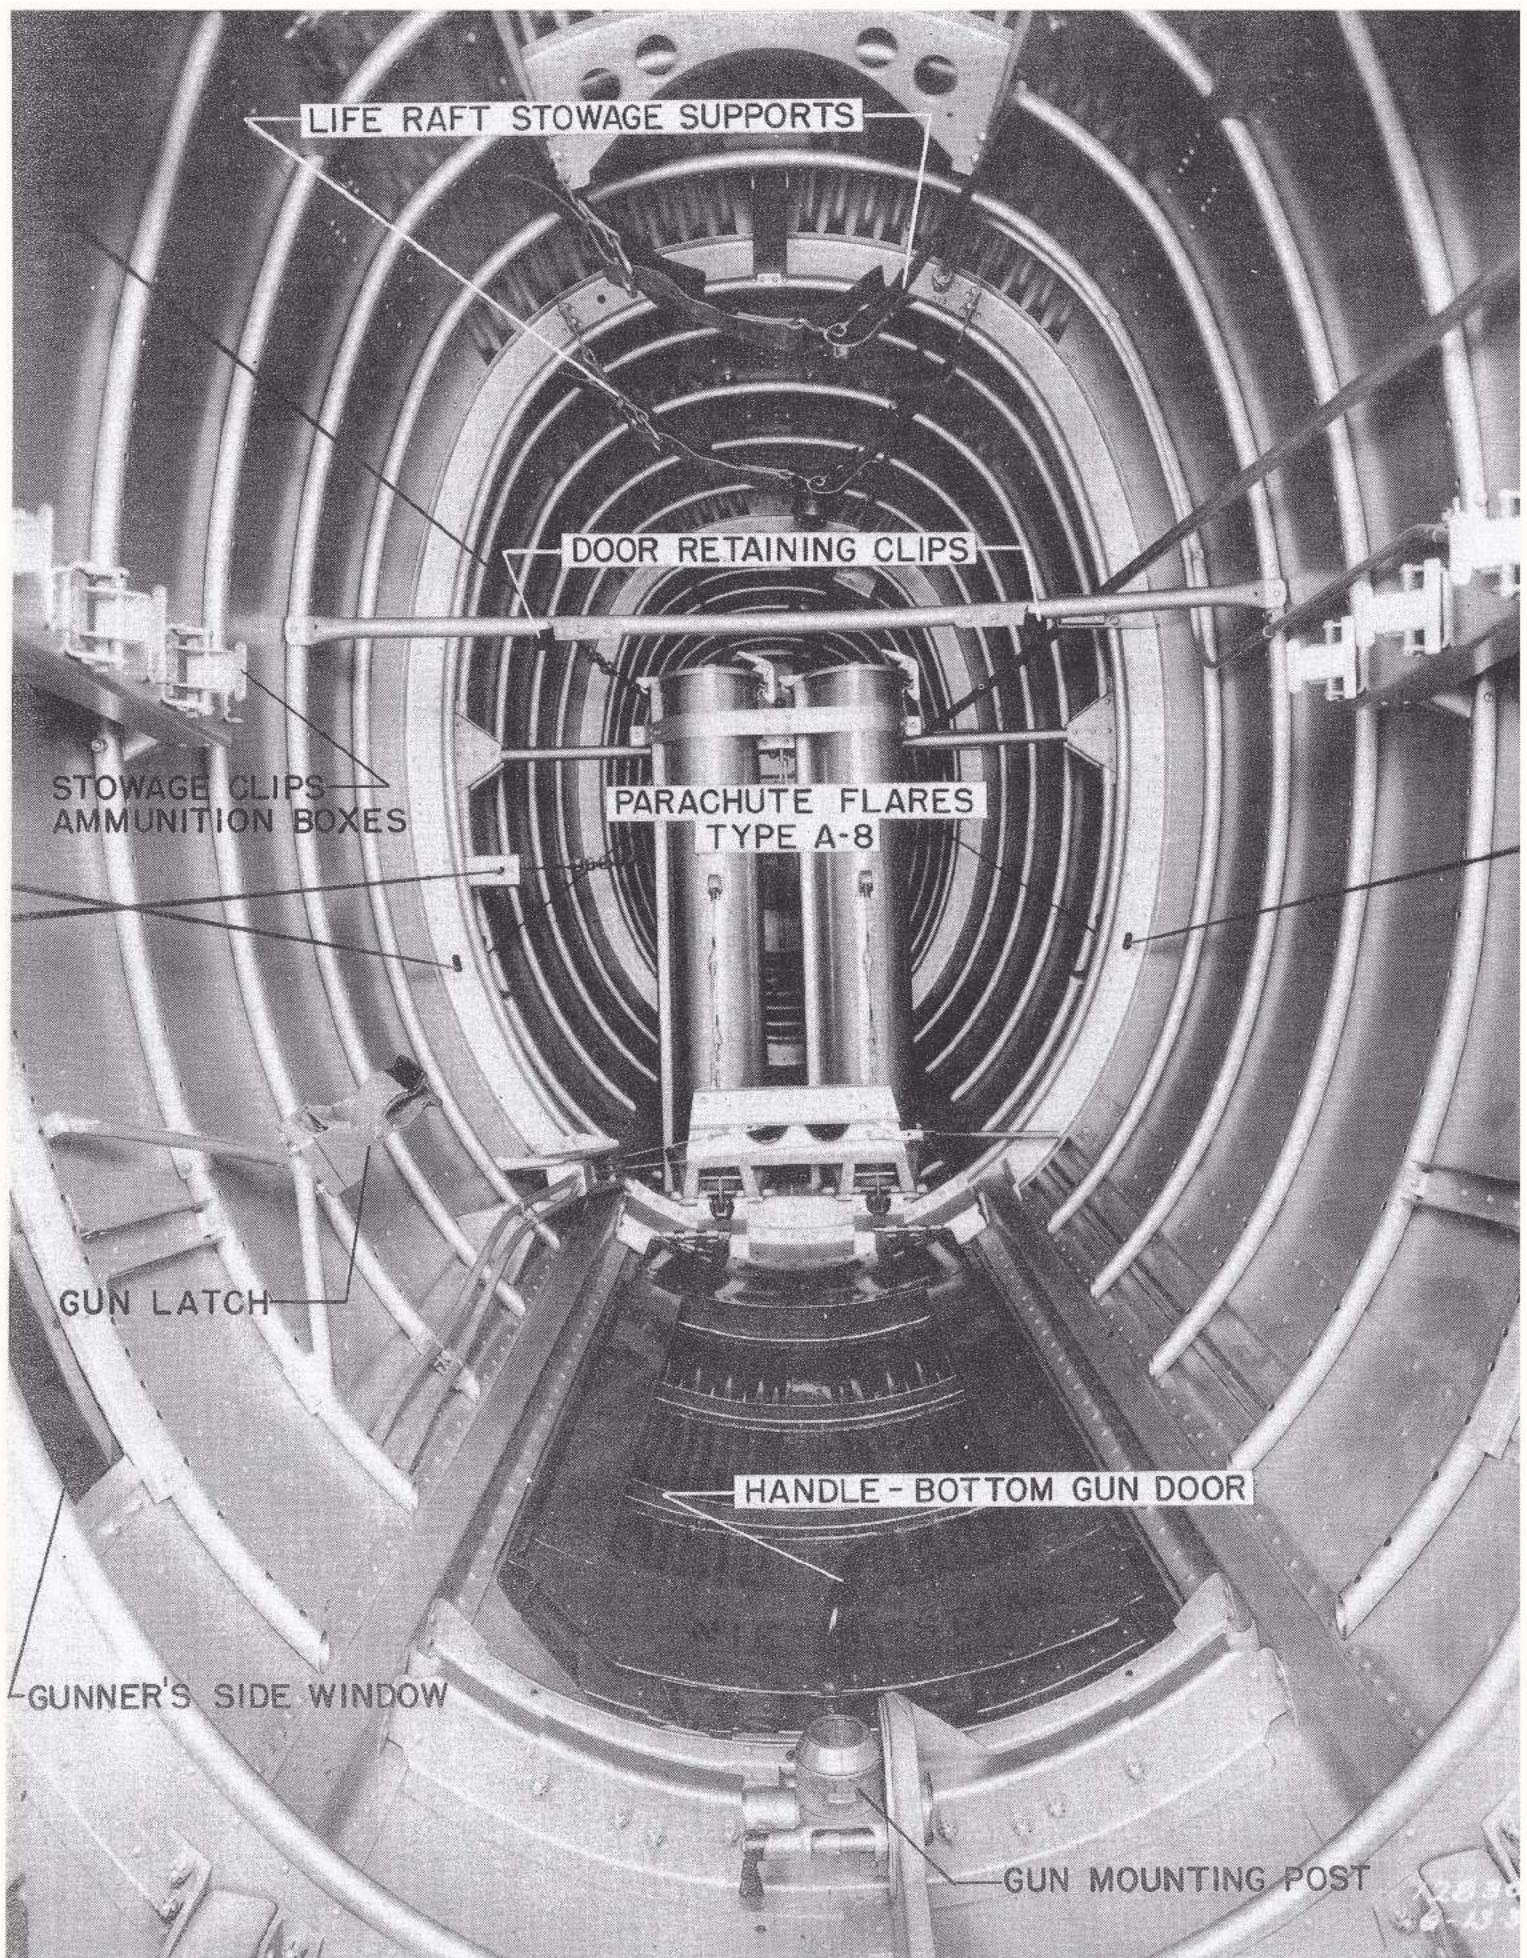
FUSELAGE TAIL SECTION - LOOKING AFT
